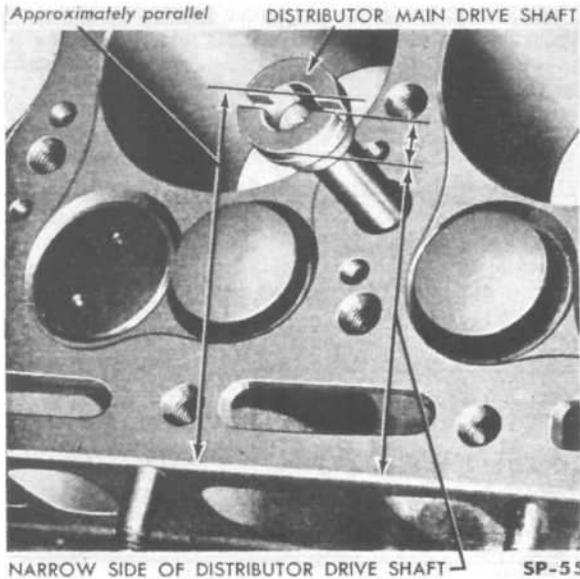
CORRECT POSITION OF DISTRIBUTOR MAIN DRIVE SHAFT
